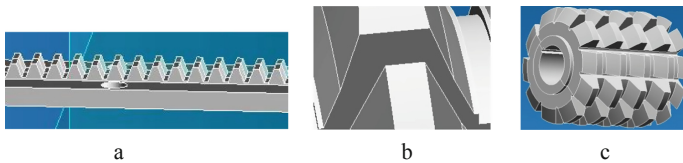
3D models: a – toothed rack; b – single form-relieved tooth; c – gear-cutting hob cutter.
